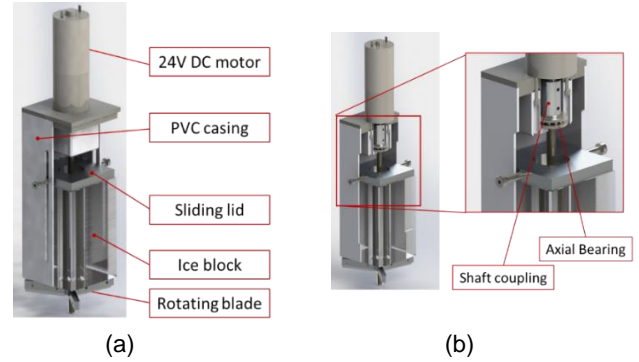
Render of the second prototype. (a) cut view of the outside PVC casing and (b) cut view of the inner casing holding the axial ball bearing and the shaft coupling for the rotating axle.
